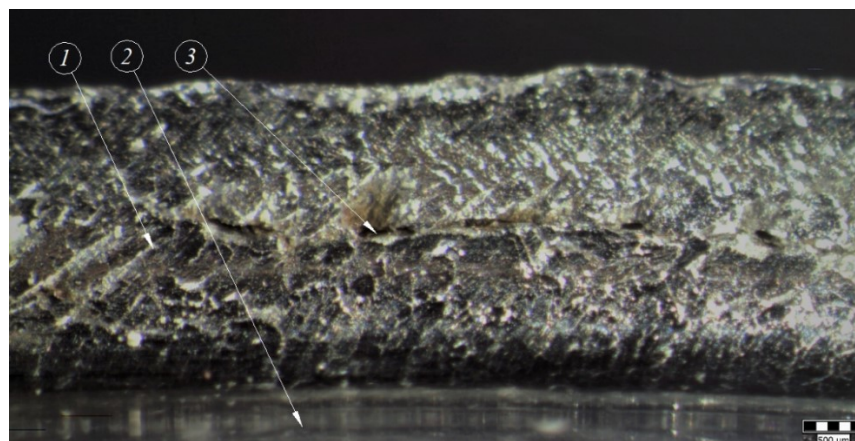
Photograph of back view of pushed materials during burnishing with force $F=1150N$: 1- back side of pushed material, 2- surface after burnishing.
